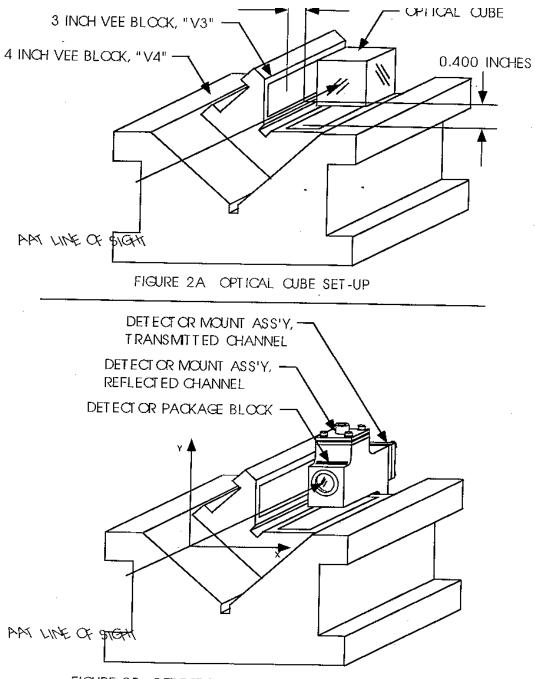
B DETECTOR PACKAGE ASSEMBLY SET-UP
